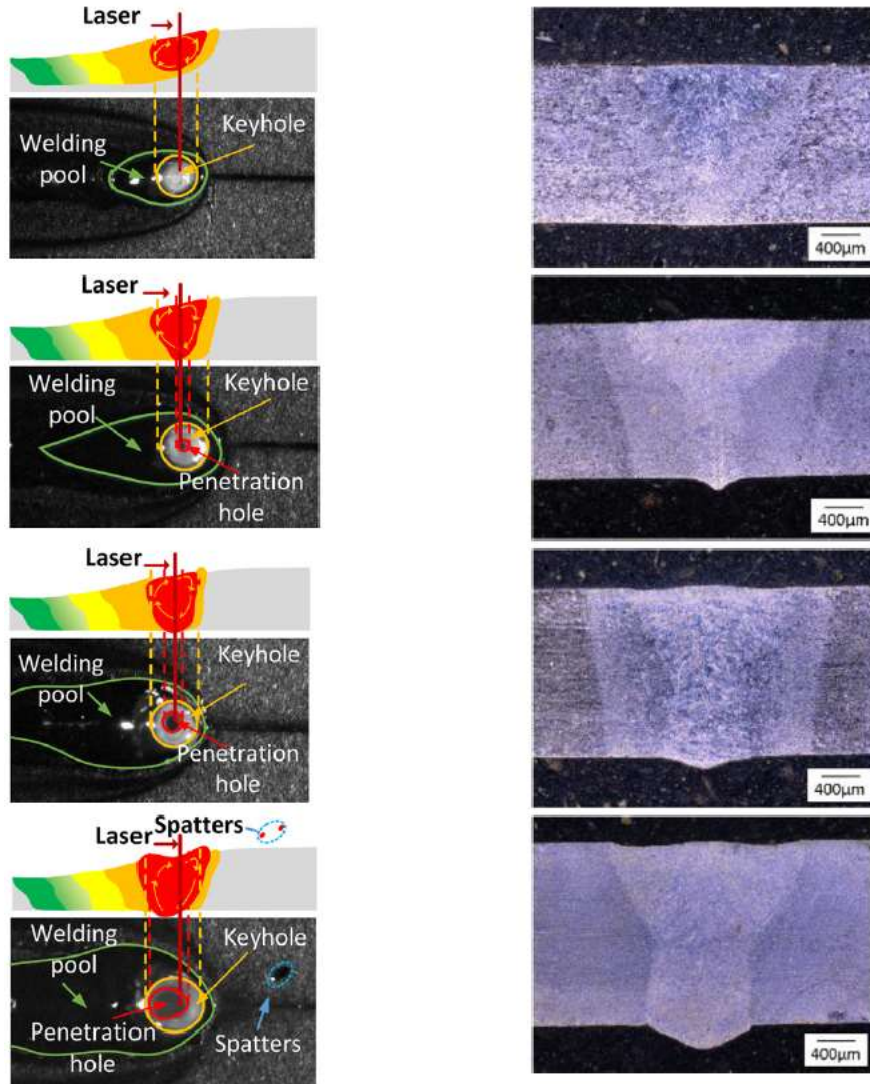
Co-axial view of weld pool and keyhole during laser welding and corresponding penetration [49].
